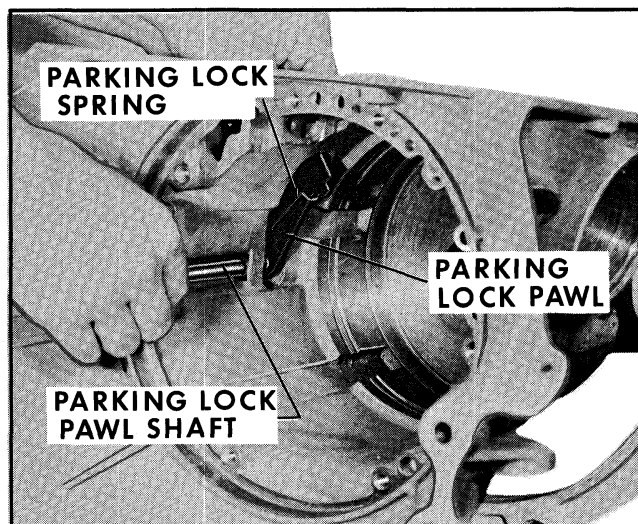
B-116 Installing Parking Lock Pawl Shaft
